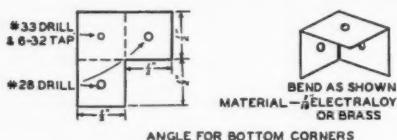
Detail drawing of the small metal angles which are to be made for the bottom corners. They can be seen in the photograph of figure 2.
